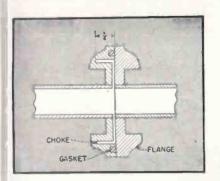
A choke-flange coupling used for connecting sections of rectangular wave guide
